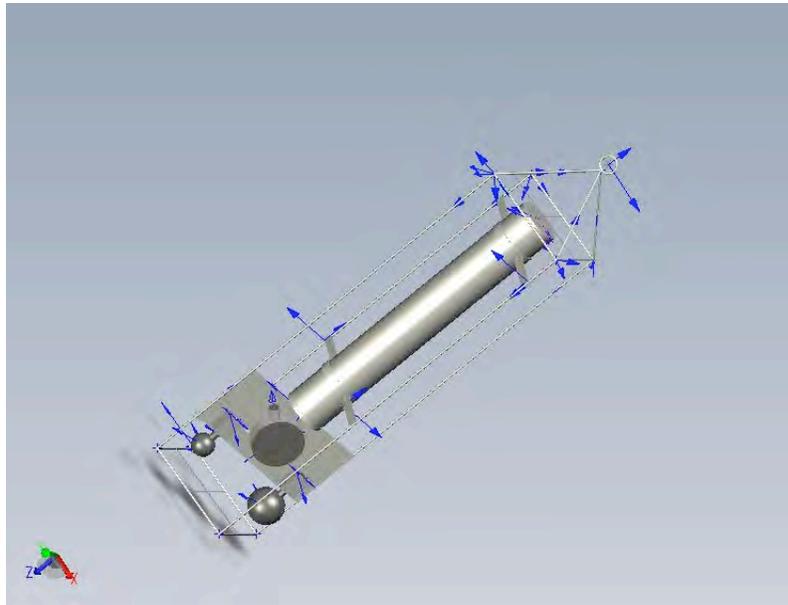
External configuration of playback device. Long dimension of cage is 1.2 m from top ring to bottom base.
